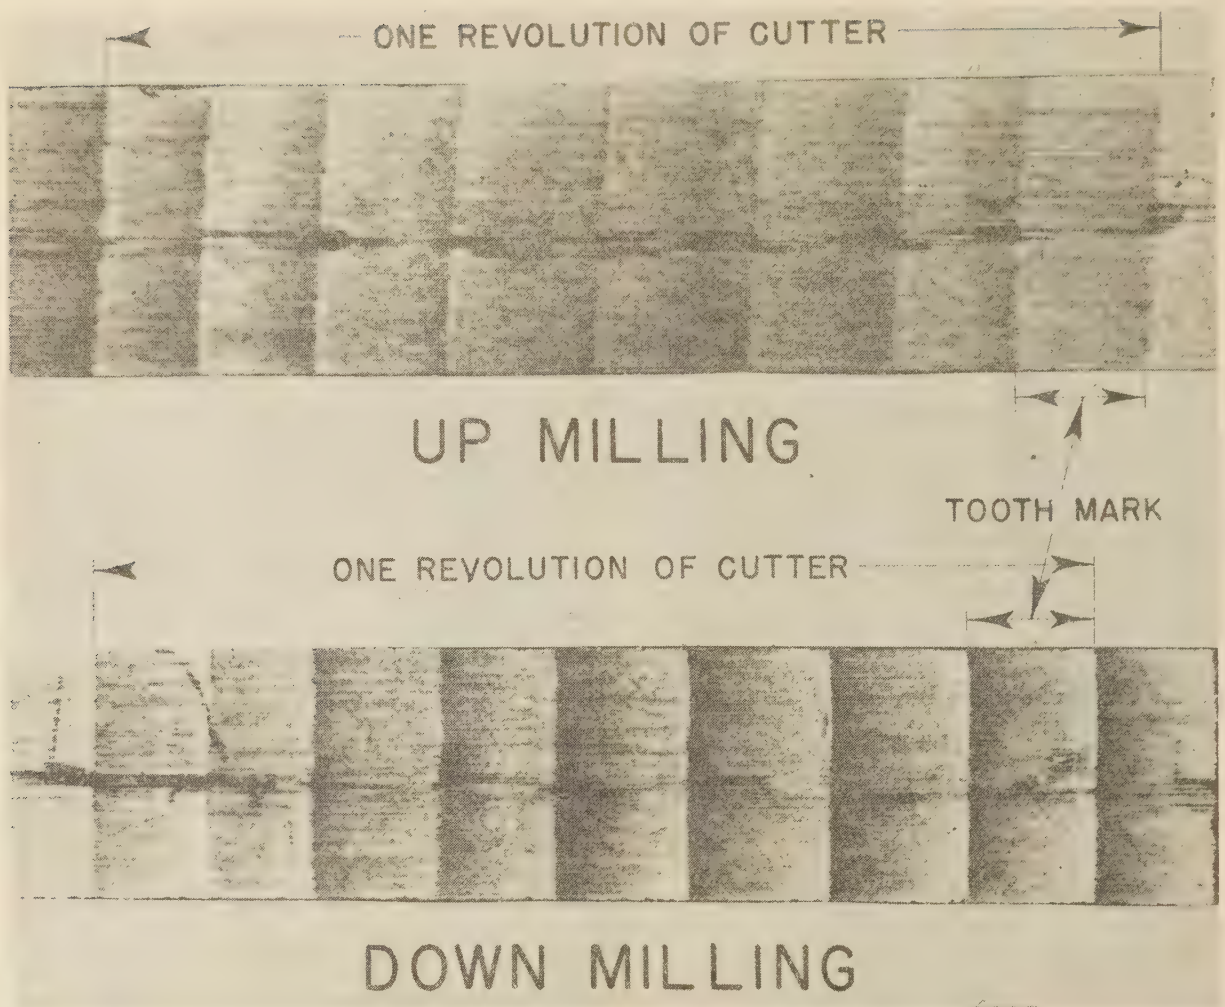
TOOTH MARKS PRODUCED ON A MILLED SURFACE IN UP MILLING AND DOWN MILLING
